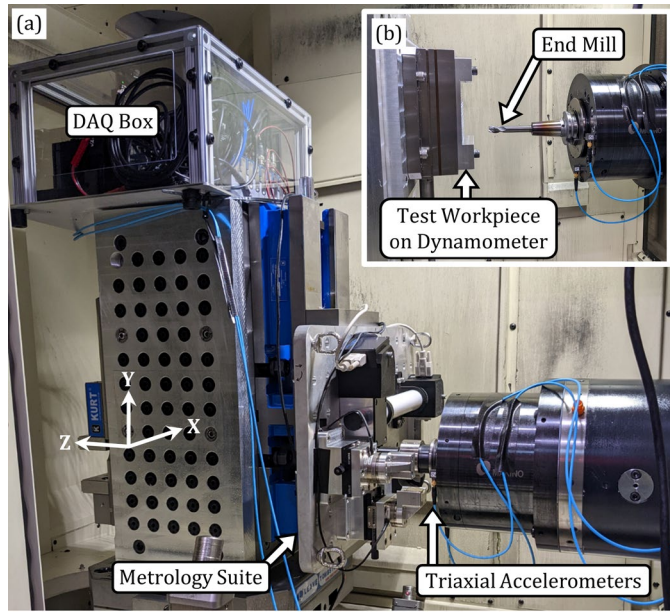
(a) Simulated cutting setup within horizontal machining center and (b) cutting setup with end mill, dynamometer, and accelerometers.
